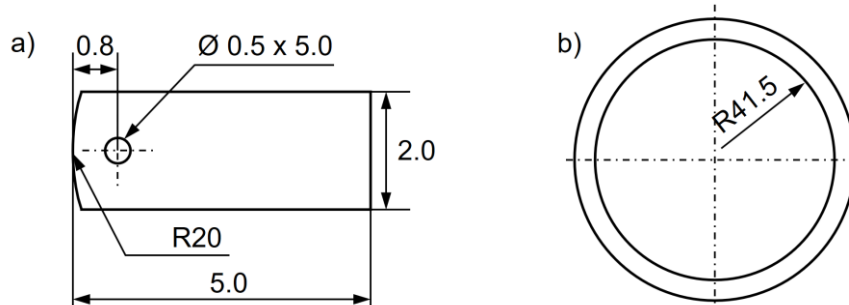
a) Geometrical dimension of the metal piston ring segment (top view). b) Geometrical dimension of the metal cylinder liner (top view)
